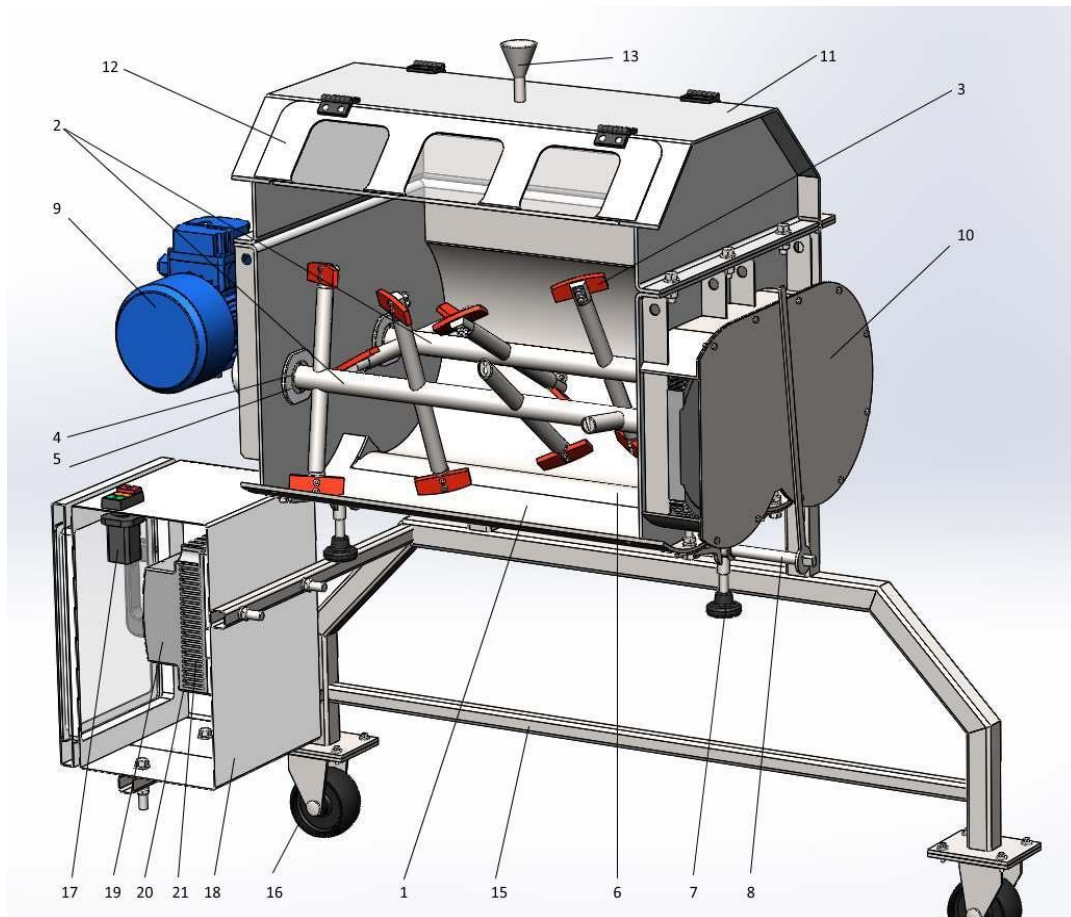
The design of the experimental setup: 1 – the case, 2 – shafts, 3 – blades, 4 – bearing assembly, 5 – shaft seal, 6 – unloading opening, 7 – lock, 8 – the lever, 9 – drive motor, 10 – synchronizer, 11 – cover, 12 – side door, 13 – CIP pipe system, 14 – pin sensor, 15 – cart, 16 – wheel with stops, 17 – control panel, 18 – electrical cabinet, 19 – relay, 20 – fuse, 21 frequency converter
